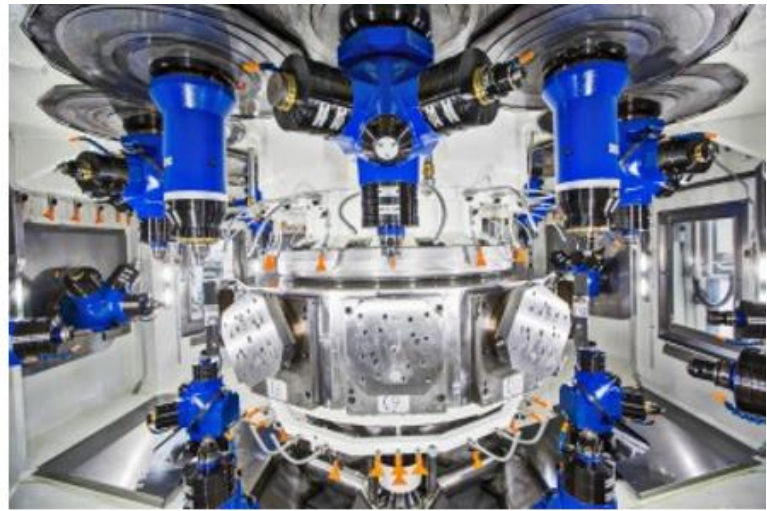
Transfer machine for manufacturing of machined components (source: Sistech Srl)
